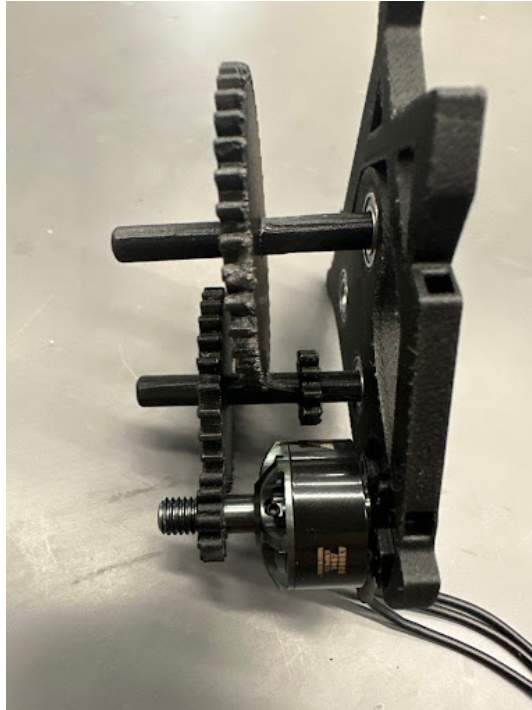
Then place the axle with the gears farther apart into the first bearing as above.
